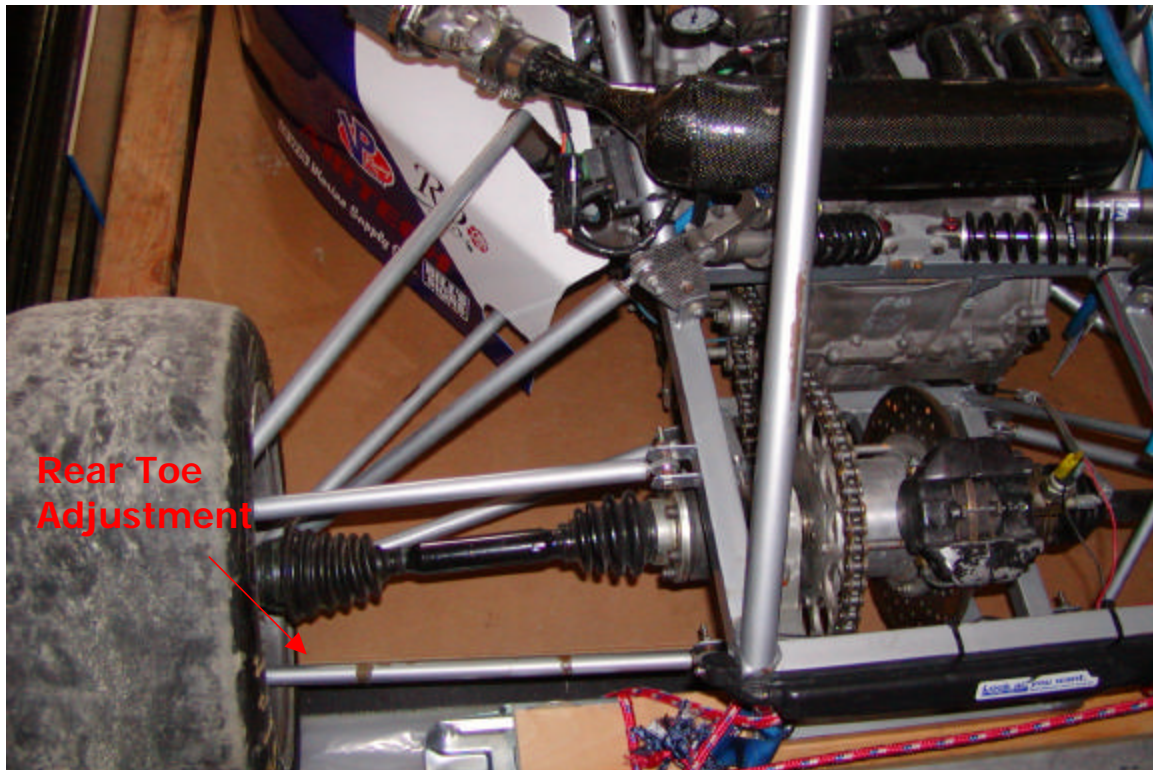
Rear Suspension with Rear Toe Adjustment Rod Shown
